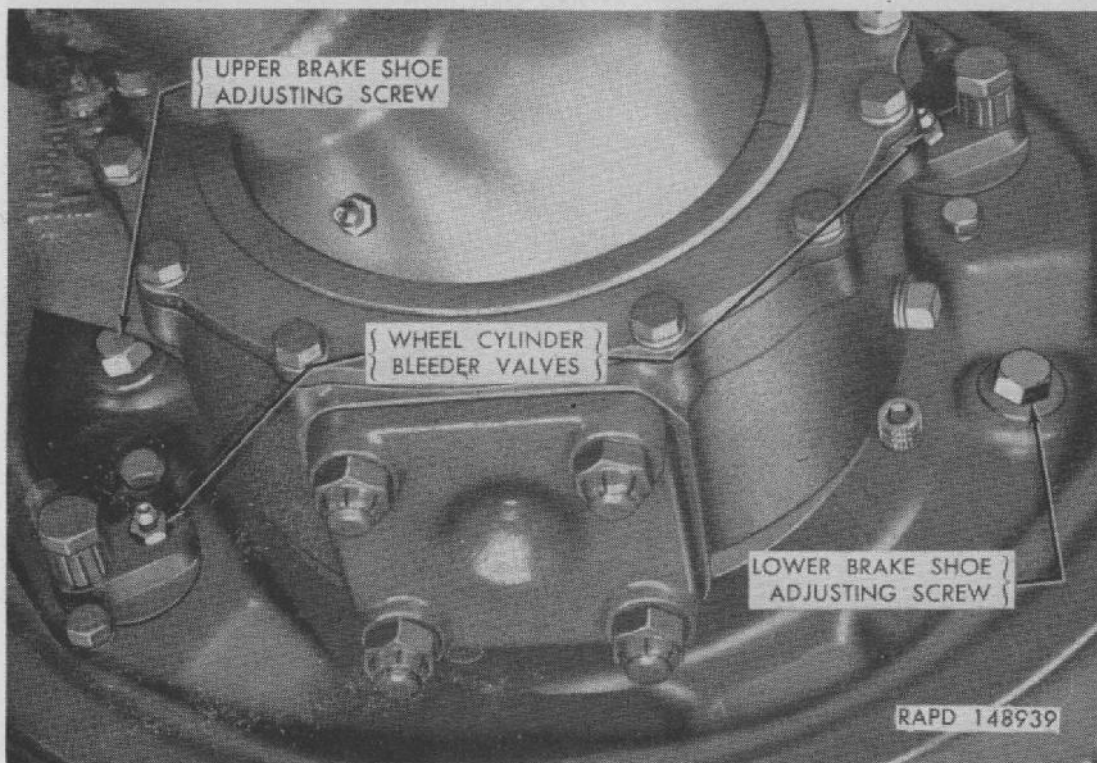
Brake bleeder valves and adjusting studs (left front wheel).
